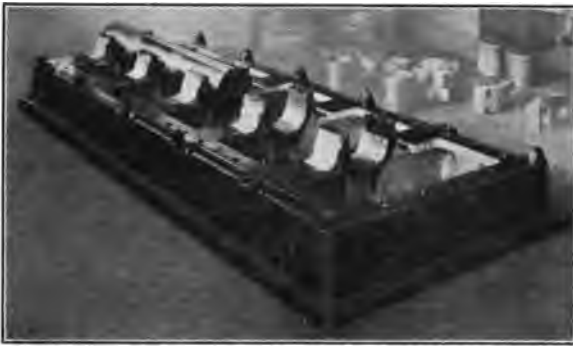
Fitting main bearings shells to seats in baseplate.
